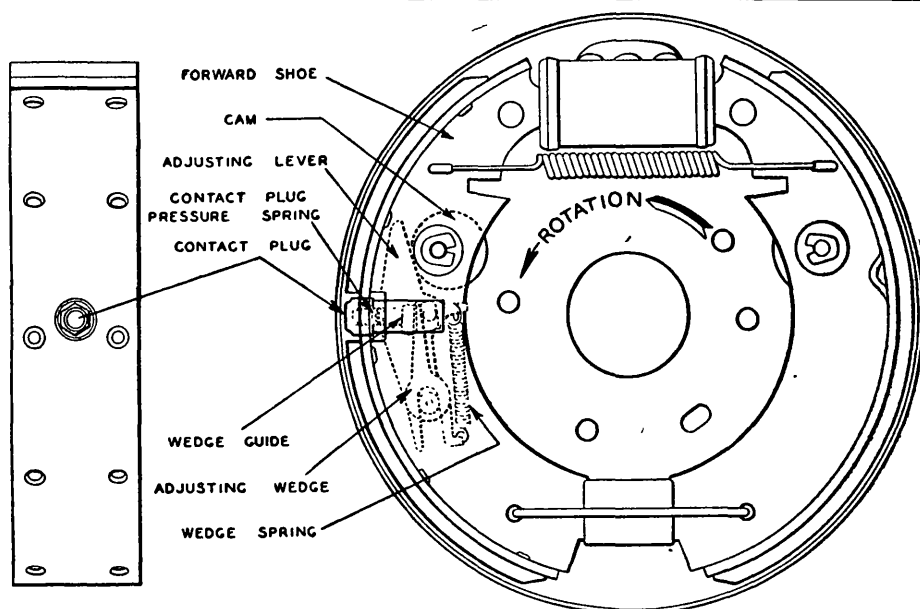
Lockheed self-adjusting, self-centering hydraulic brake
